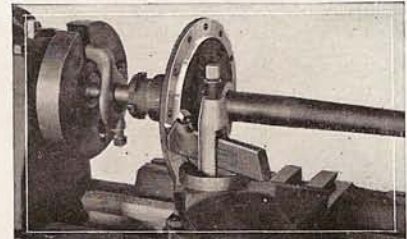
Truing a Damaged Rear Wheel Hub Flange Mounted on an Axle.
